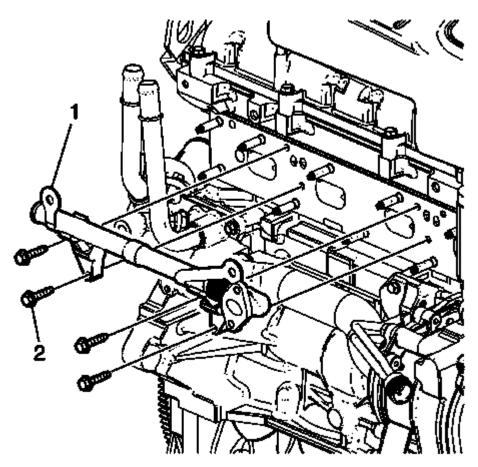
Secondary Air Injection Pipe Assembly Courtesy of GENERAL MOTORS COMPANY
